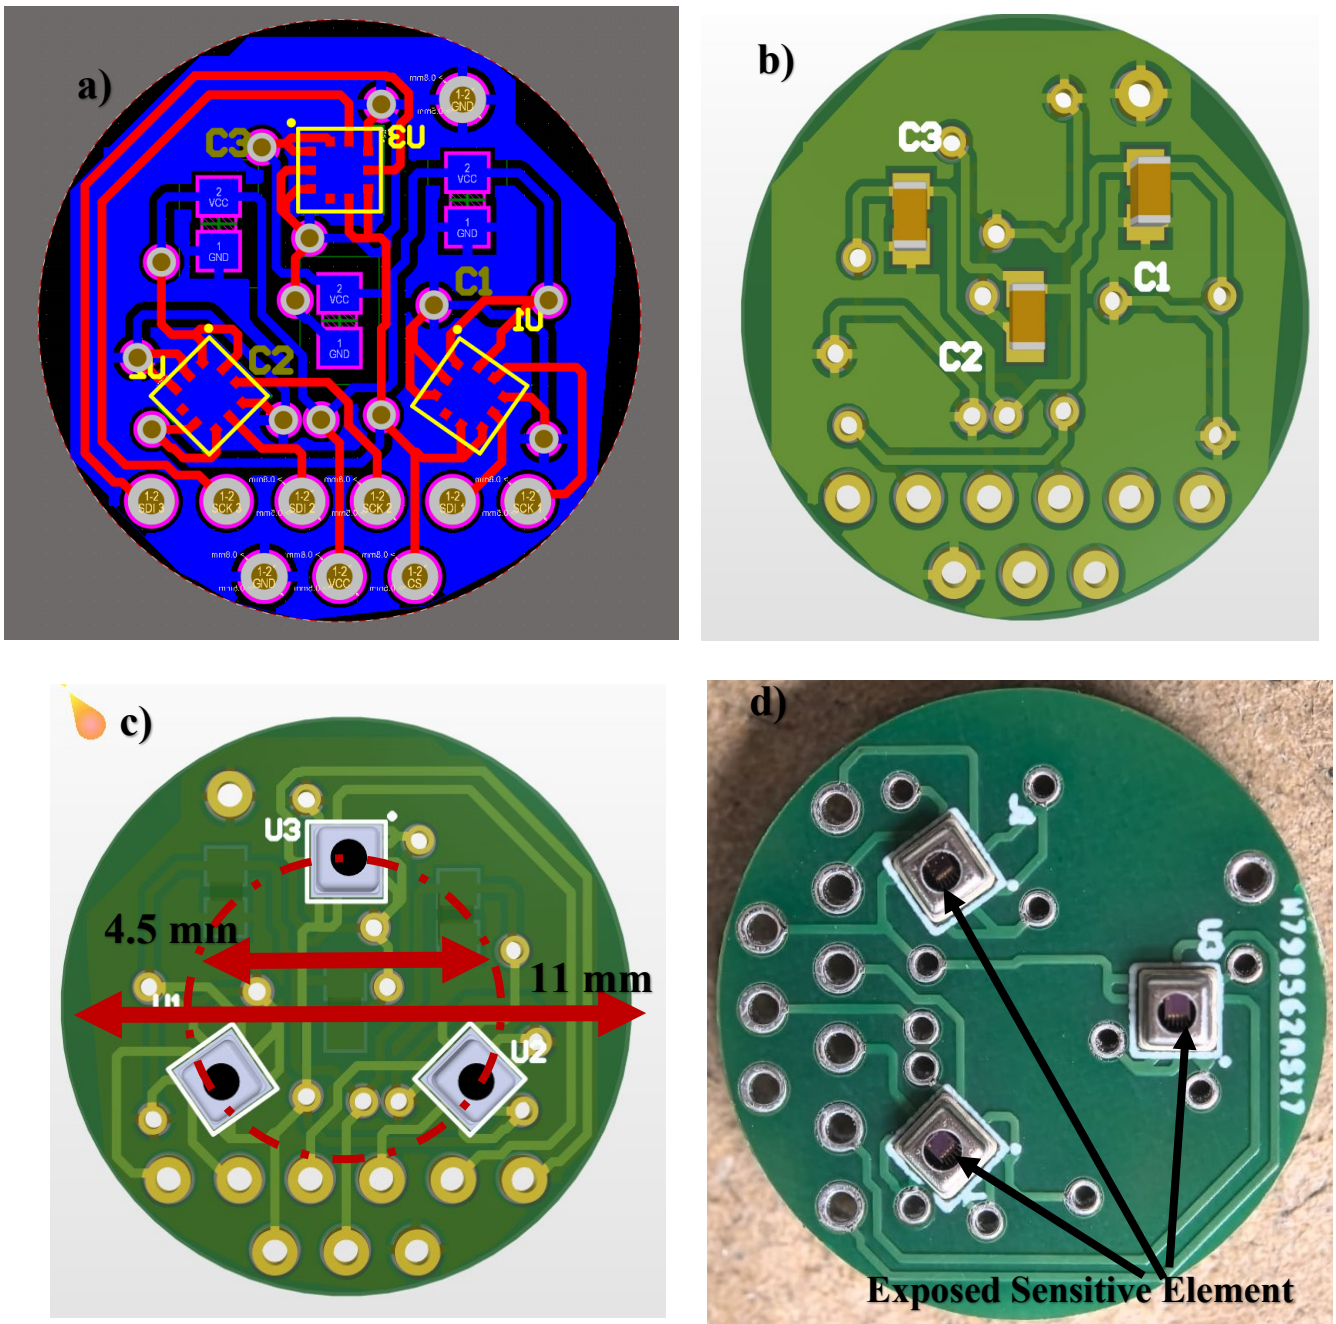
Representation of the PCB design used a) PCB design circuit view, b) PCB board showing the parasitic capacitors used, c) PCB board showing the barometric sensors, d) PCB board developed exposing the sensitive elements.
